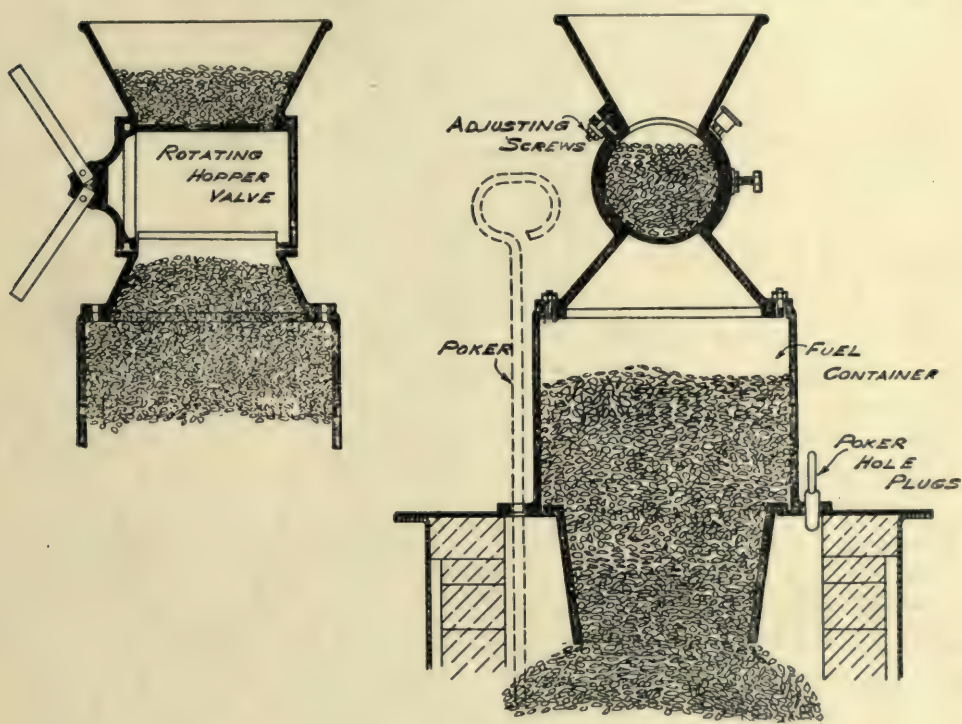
CHARGING VALVE OF CROSSLEY SUCTION GAS PRODUCER.
